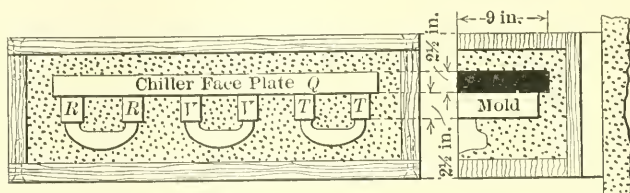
OPEN SAND MOLD FOR MAKING COMPARATIVE CHILLING TESTS
